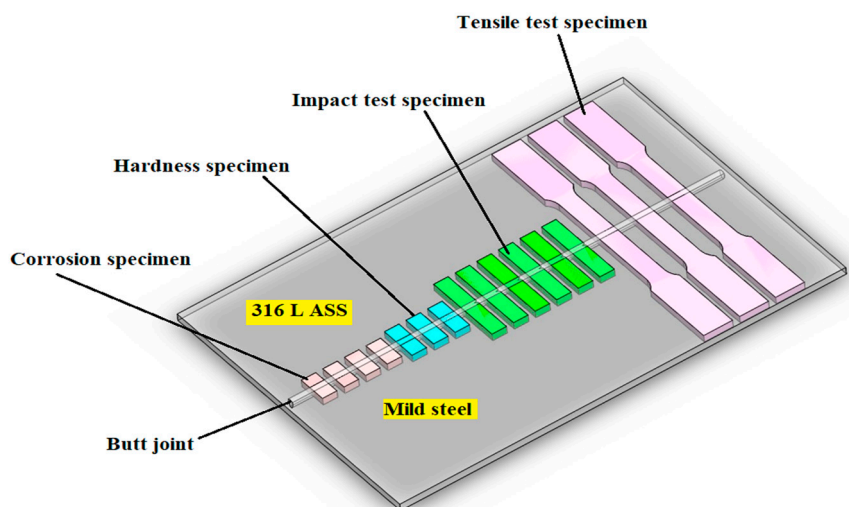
Test specimens for mechanical testing and weld morphology.
